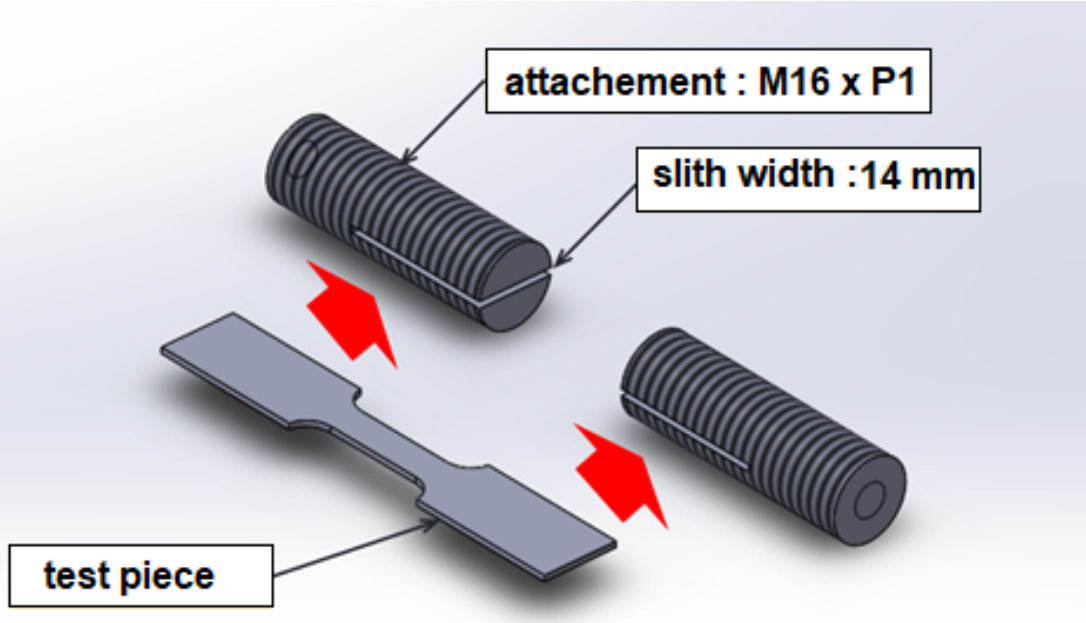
Mount mechanism of flat plate specimen for impact tensile test
